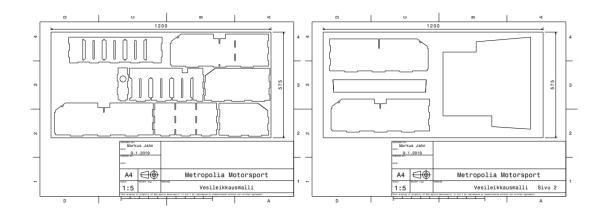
Technical drawings of composite plates for waterjet cutting instructions.
